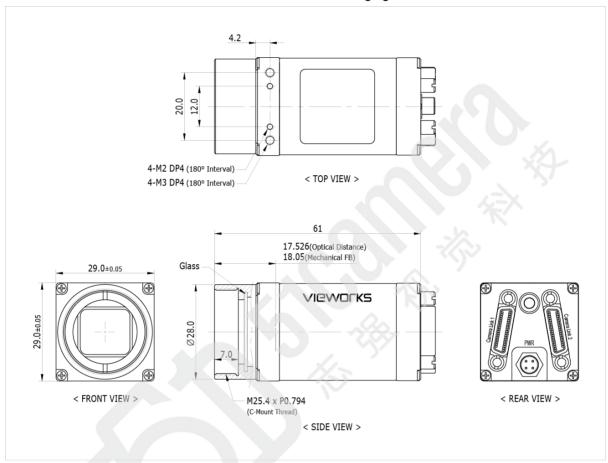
VQ-4MC-M/C 180 F C-mount Mechanical Dimension
